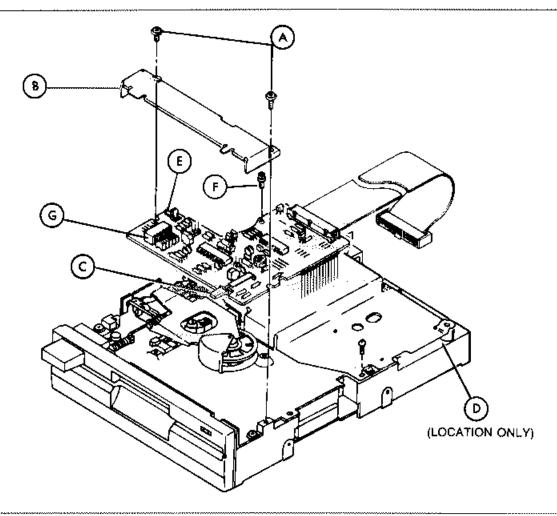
FDD CONTROL BOARD REMOVAL/REPLACEMENT
